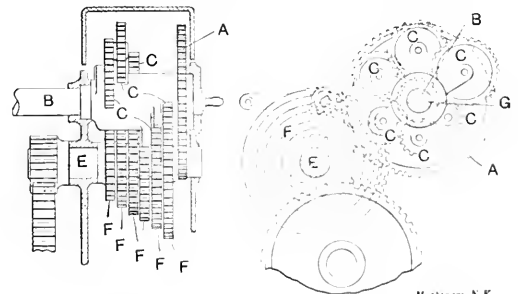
Patent No. 727,404, granted to J. Mills, May 5, 1903.
